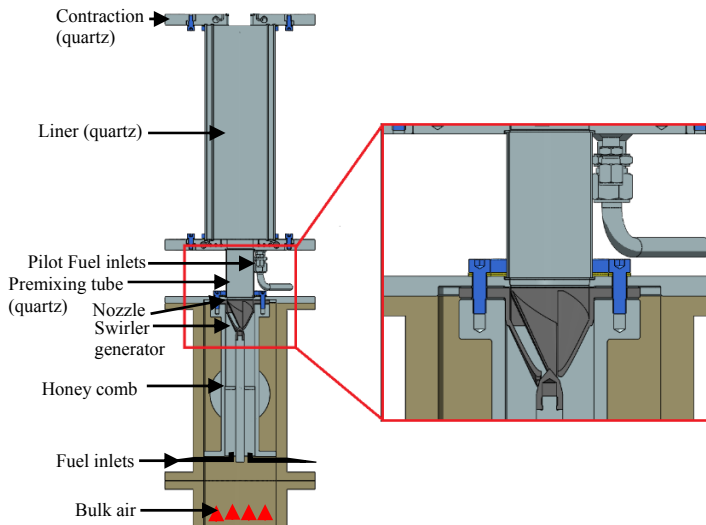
Cross-section of the CECOST swirl burner assembly.
